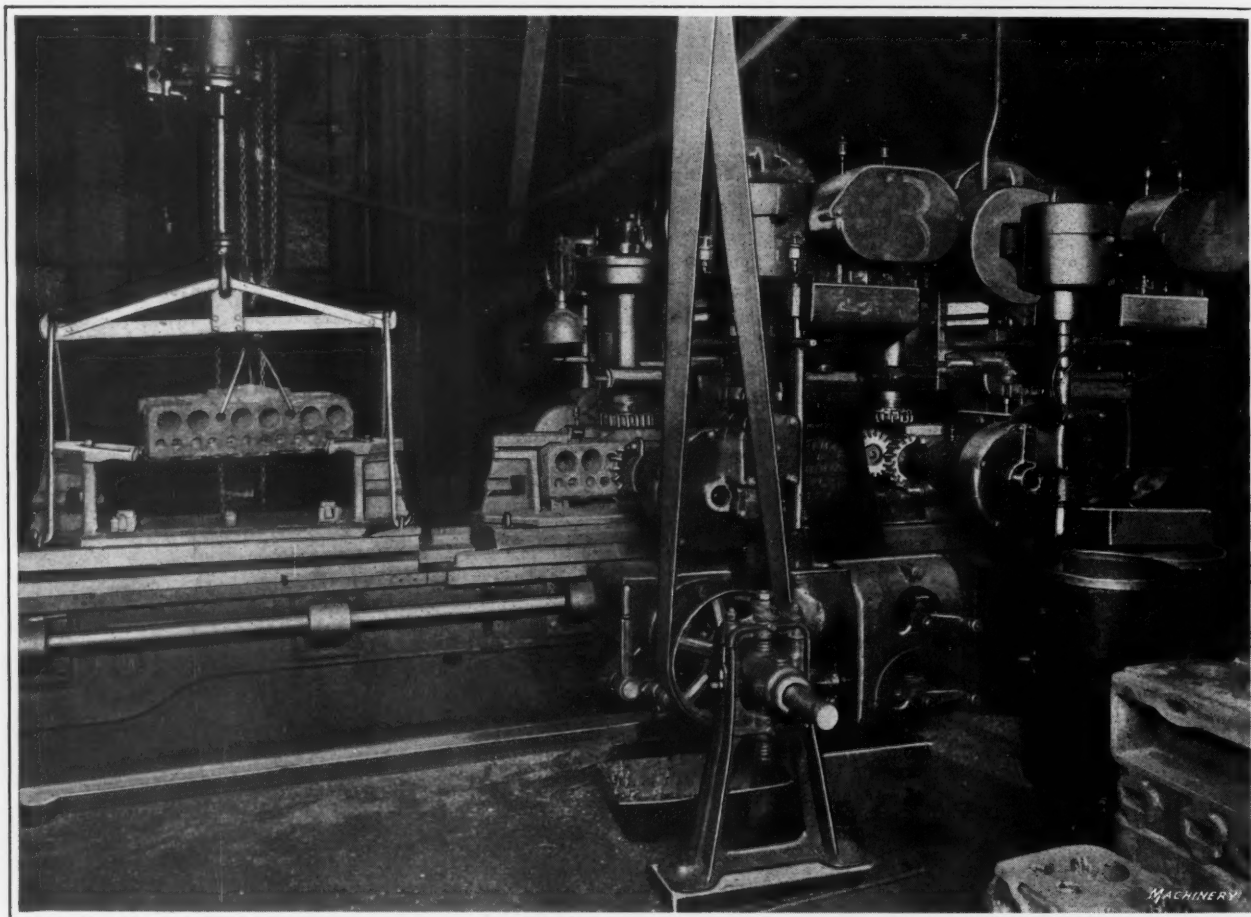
Complete View of Machine partially illustrated in Fig. 10, showing the Method of returning a Table Section to the Starting Point on the Bed of the Machine
